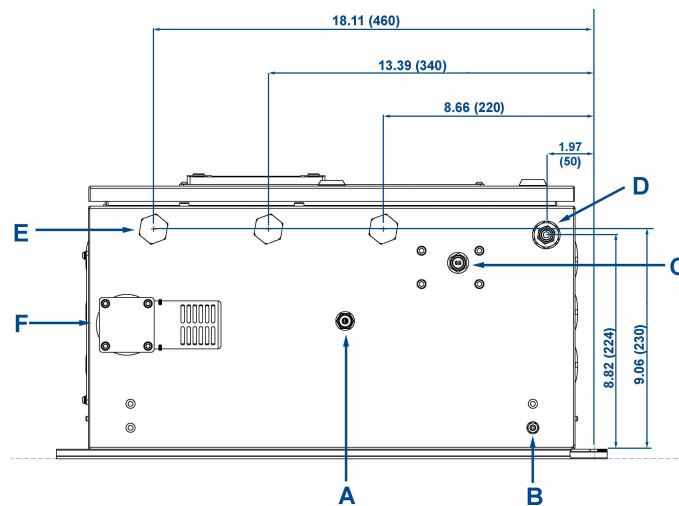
Rosemount CT5100(Ex) Dimensions - Top View
